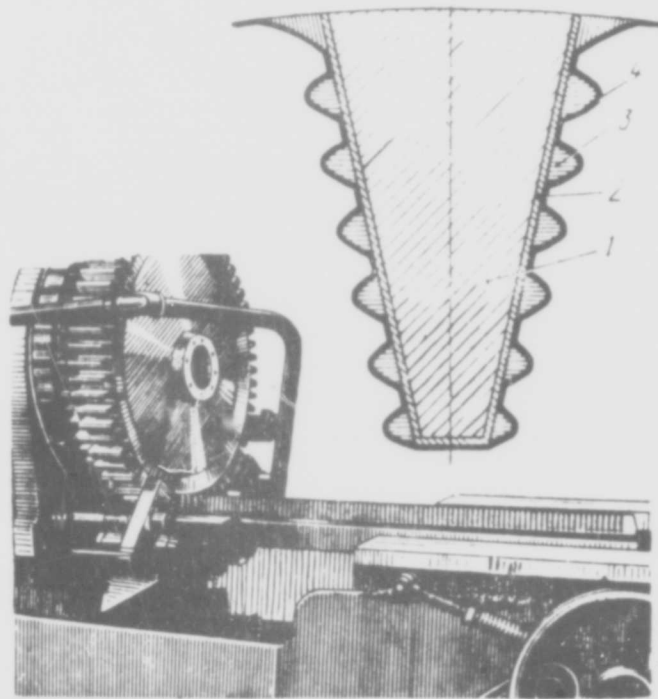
Working grooves on horizontal broaching machine and diagram of broaching. 1) allowance, taken by milling; 2-4) allowance, taken by consecutive broachings.
